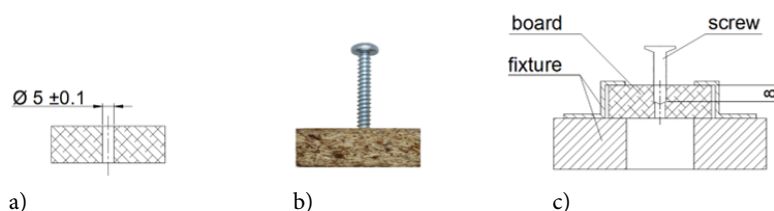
Preparation of specimens for measuring the force during screw removal in the direction perpendicular to the surface of the board: a) pre-drilling, b) view of screw inserted into the specimen, c) method of fixing the specimen in the holder
